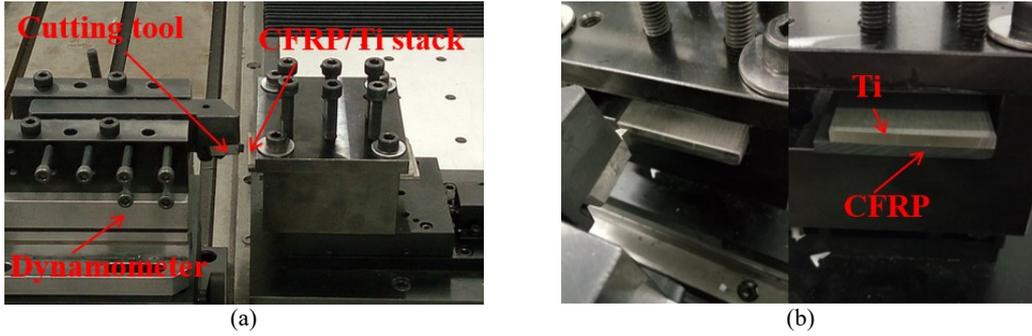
Experiment setup of machining CFRP/Ti stack composite. (a) the entire experimental setup. (b) the close-up of the clamped workpiece
